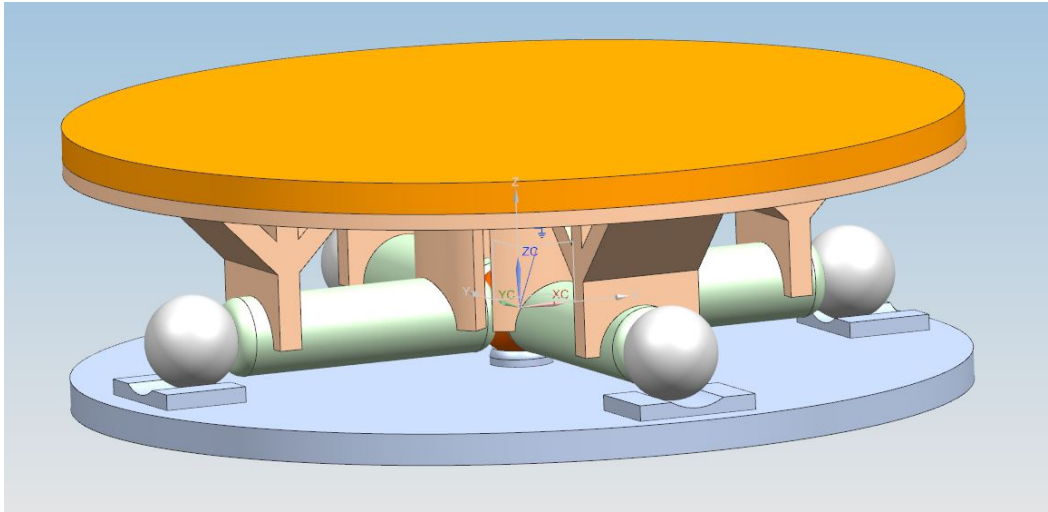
CAD-assembly of magnet sticks combined with an silicone top.
